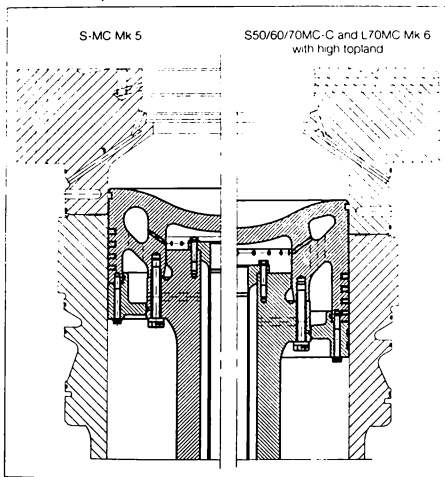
Piston pack assembly MAN-B&W MC vs MC-C
